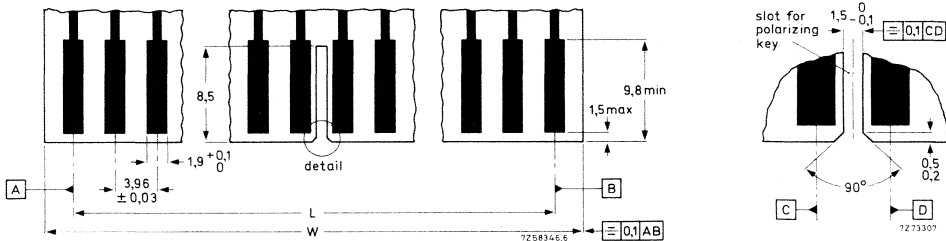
Recommended dimensions of the printed-wiring board; see Table 4 for dimensions L and W.
